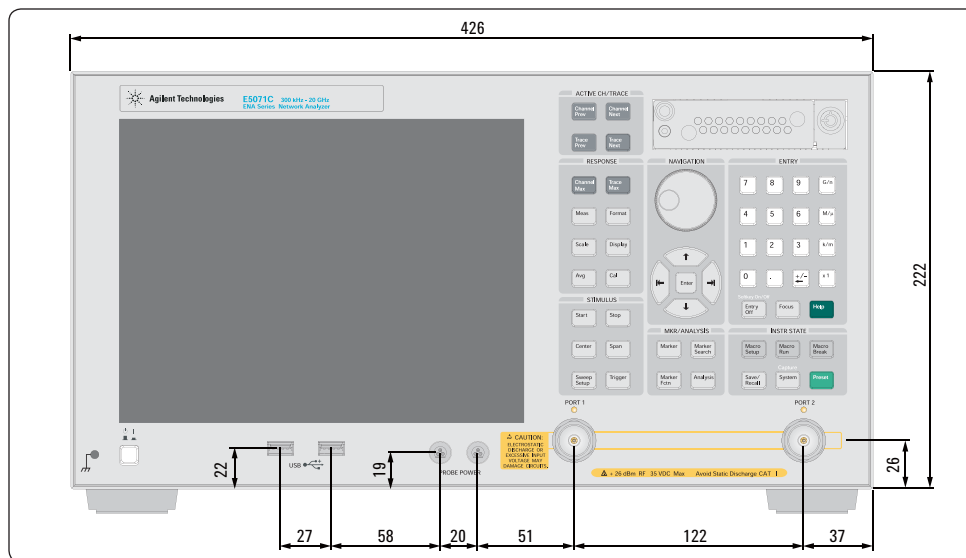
Dimensions (front view, E5071C with Option 2D5/2K5, in millimeters)
